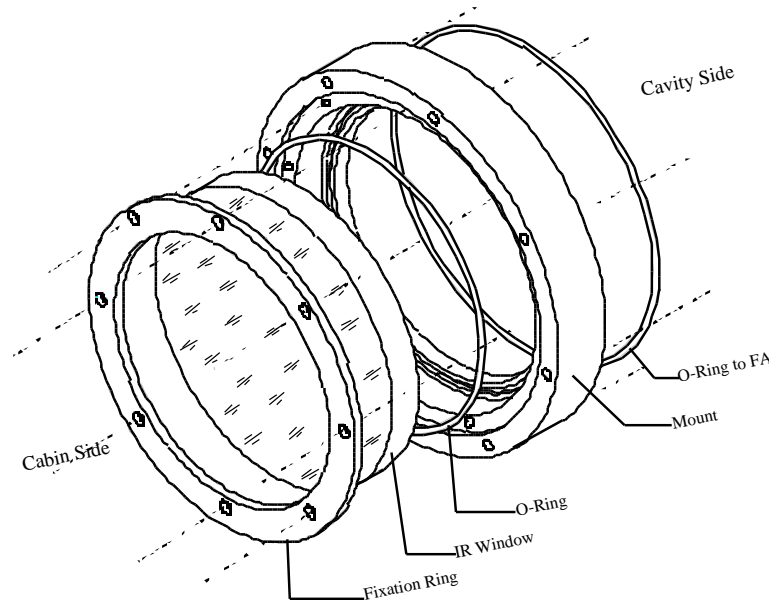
b: Example for a possible concept of Optical Window Mounting Assembly
